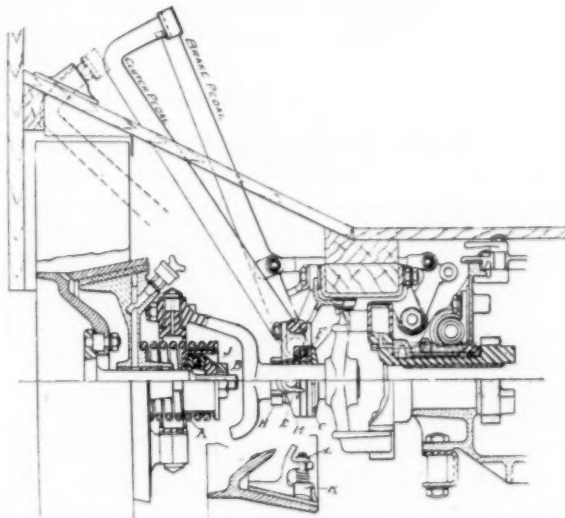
CLUTCH OF SMALL DIMENSIONS FOR 30 H.P. CAR
